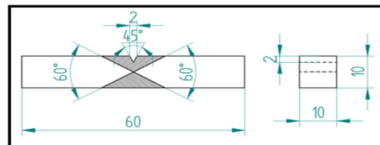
Dimension of the V notched specimen for Impact (charpy) toughness test as per ASTM E 23 standard (All dimensions are in mm)
